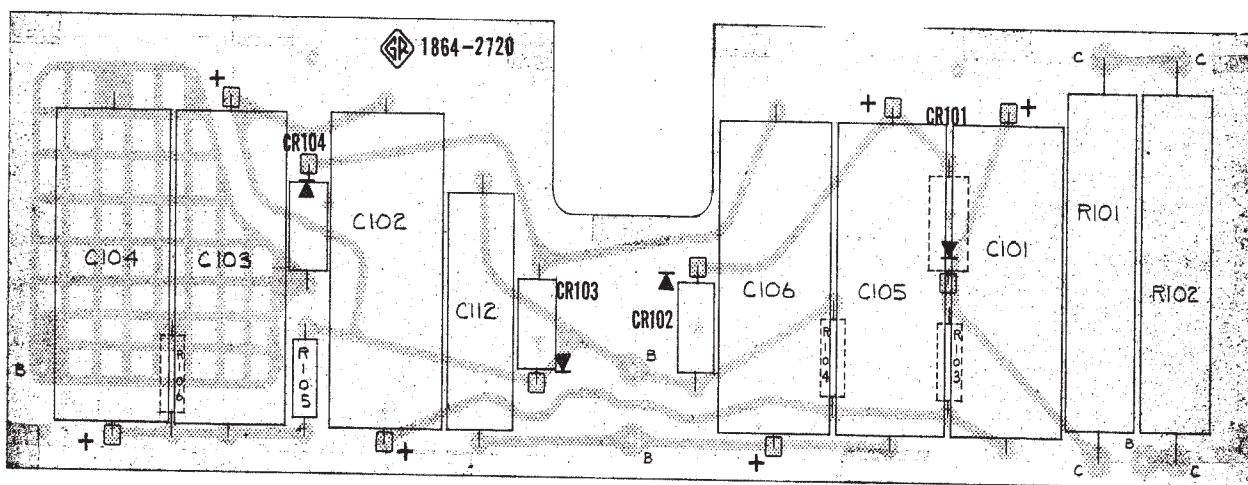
Type 1864 rectifier circuit etched-board assembly (P/N 1864-2720)
